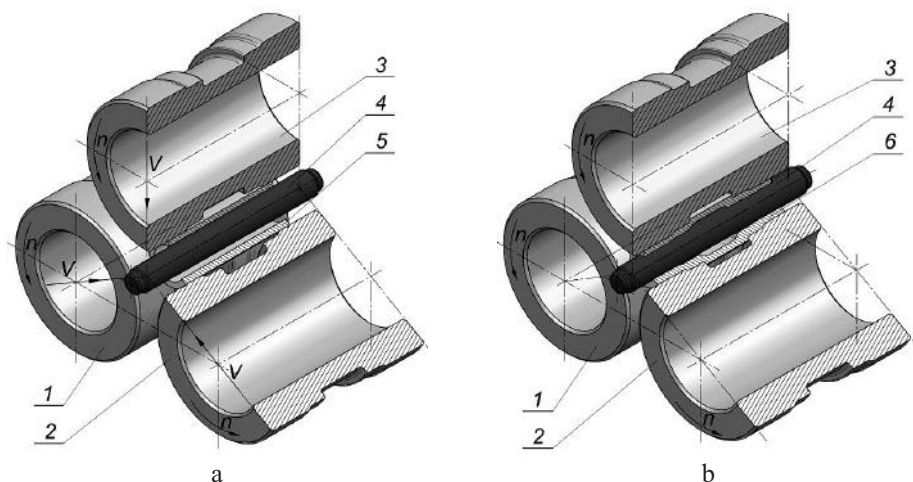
Process scheme of rotary compression of hollow forgings over a mandrel: beginning (a) and end (b) of the process: (1–3) stepped rollers, (4) mandrel, (5) billet, and (6) forged part.
